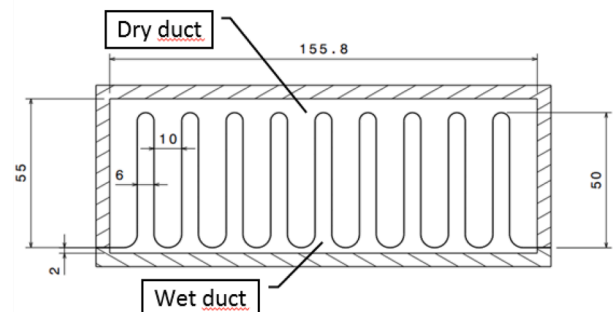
Dimensions (in mm) of the dry and wet channels.
